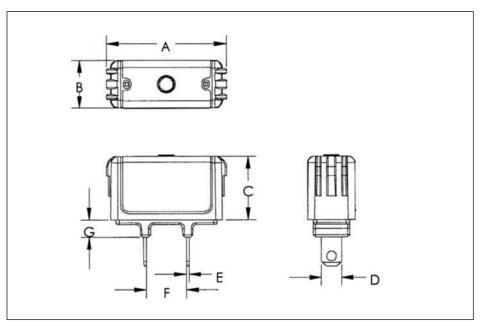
CUBEFuse Dimensions in Inches (mm)
